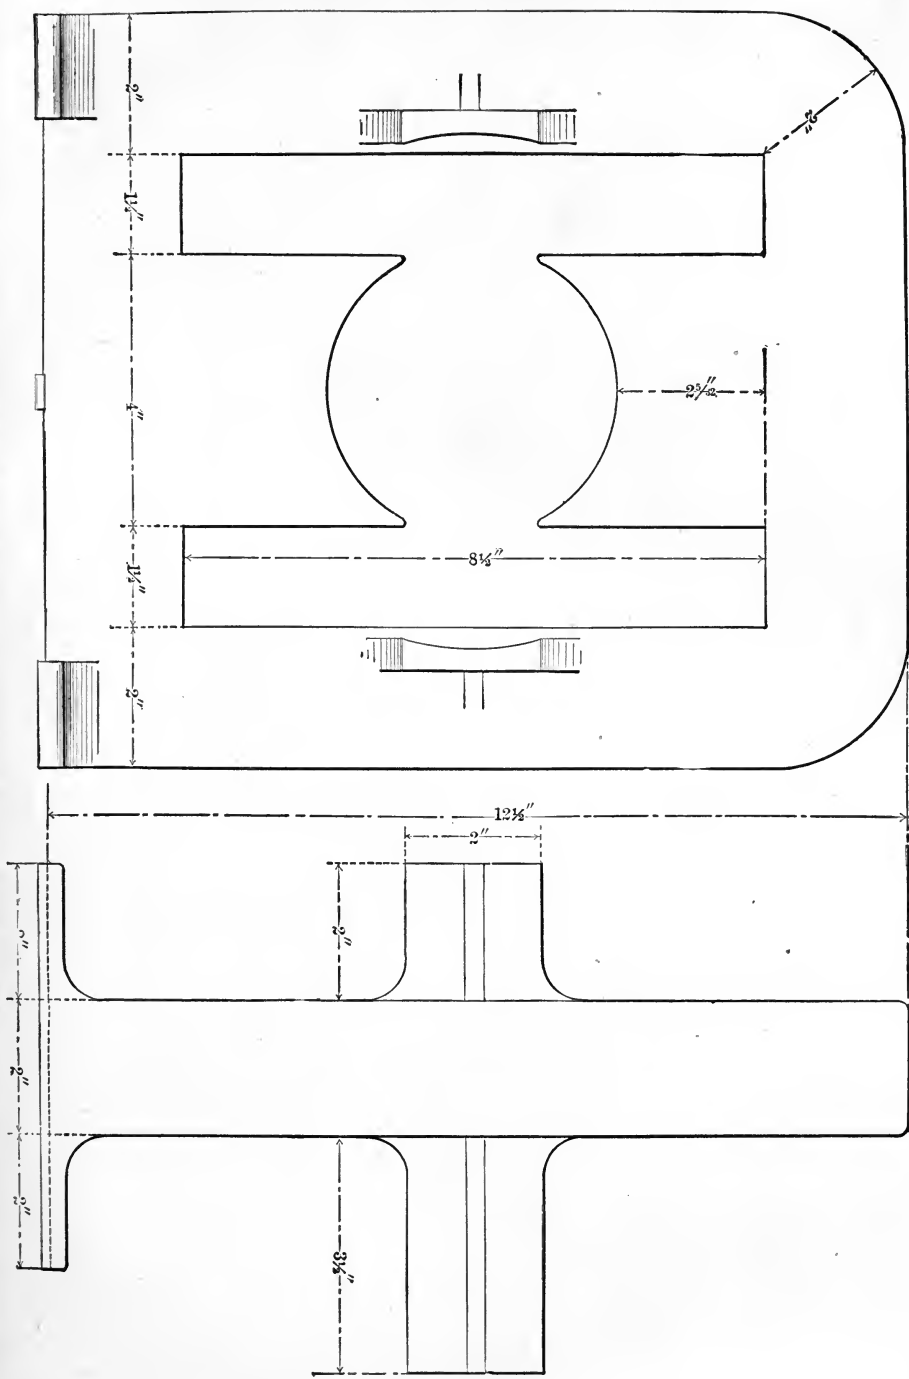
SIDE AND END ELEVATIONS OF BIPOLAR IRON-CLAD FIELD MAGNET.
